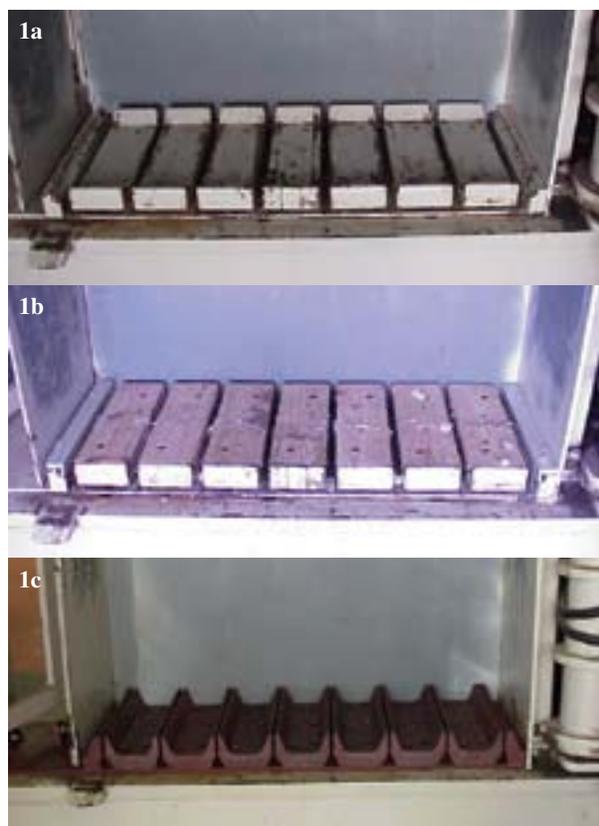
Bottom platens used in pressing the bales. Shown are A.) Standard bottom platen for Continental Bespress. Note the outside edges of the platens are turned up to make it easier to insert the bale ties. B.) Standard platen with wooden inserts to create a flat platen. Similar inserts were used on the top platen for all treatments. C.) Cast steel platen.
